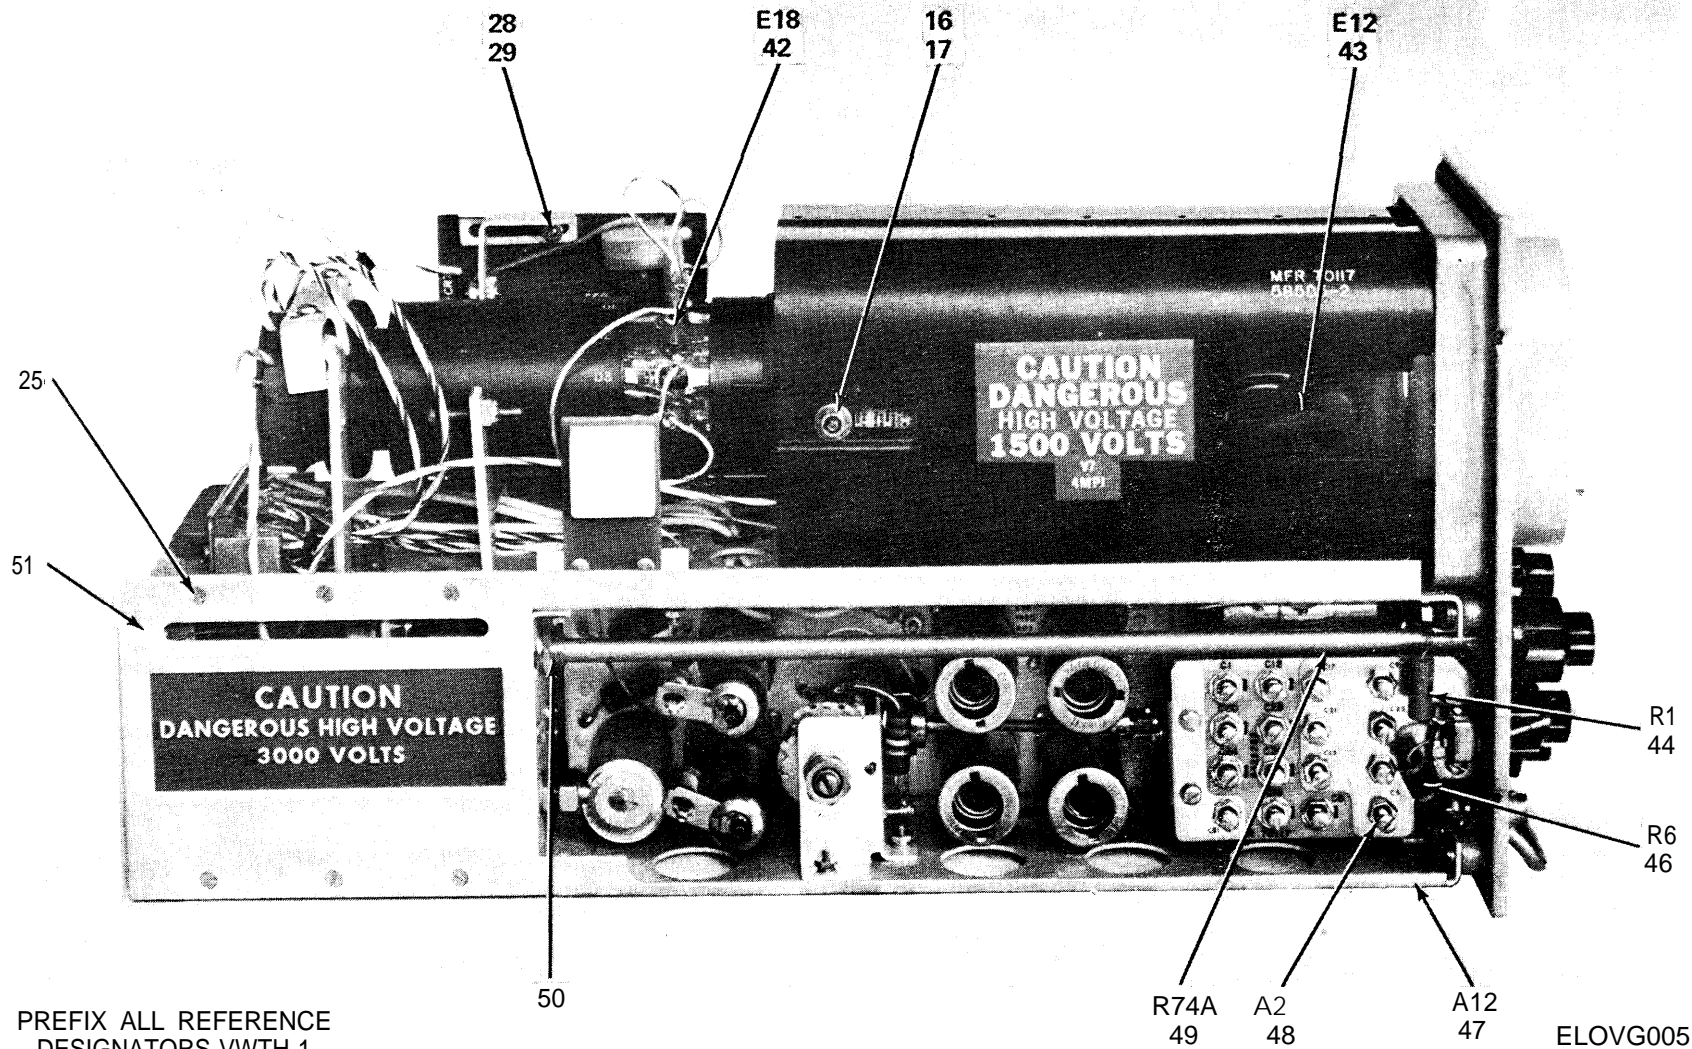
③ Display module main assembly (Sheet 3 of 6).
